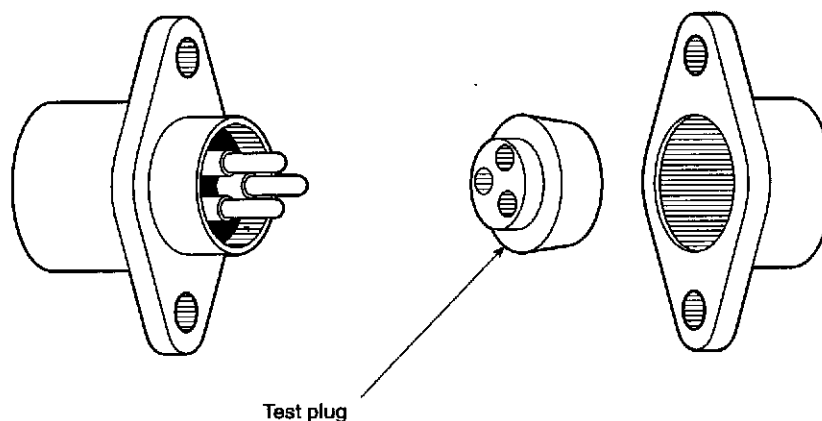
Positioning of a Molded Test Plug over the Contacts of a Pothead
